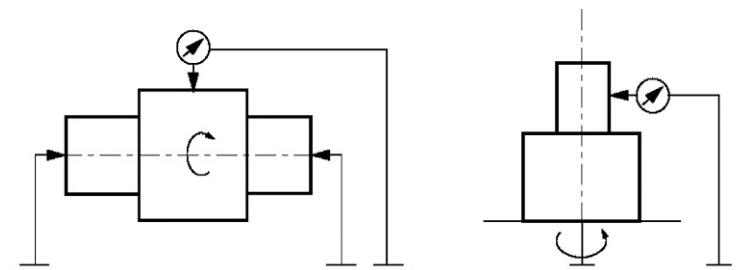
Measurement of the run-out deviation with revolving workpiece
